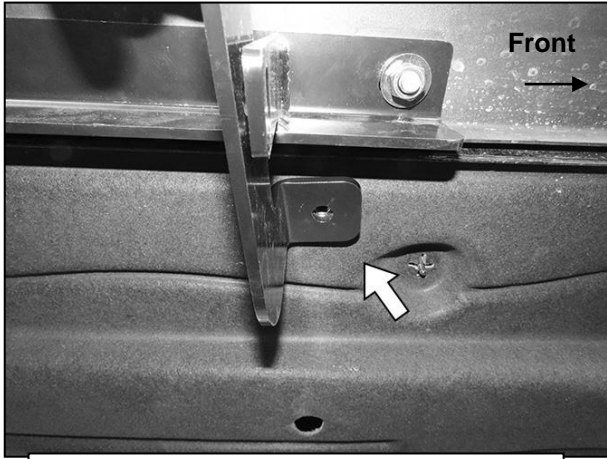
B) For Hybrid Models, attach passenger/right center Support Bracket the Nut Plates
